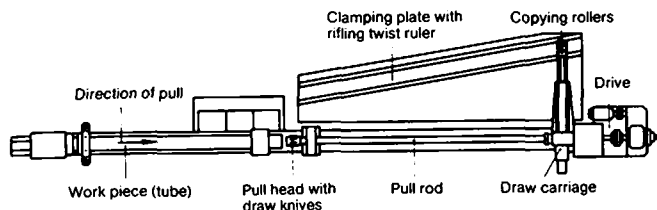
Draw bench for rifling grooves (schematic drawing).
